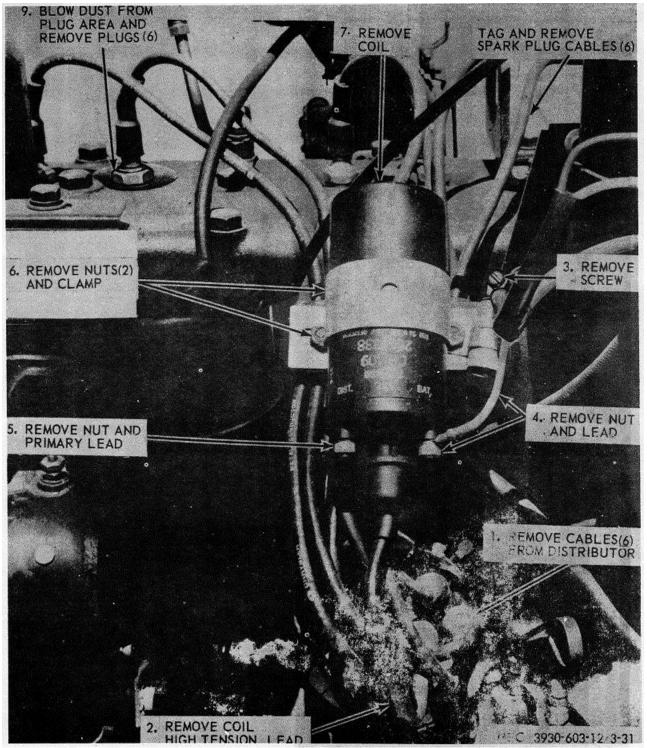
Coil, spark plugs and cables, removal and installation.
